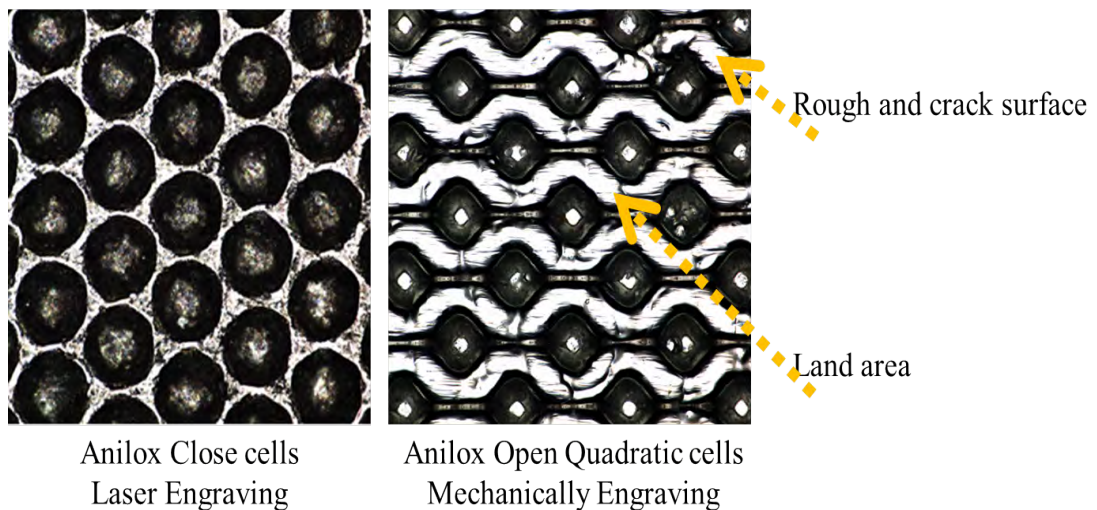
Anilox cells engraved by laser and mechanically engraving techniques
